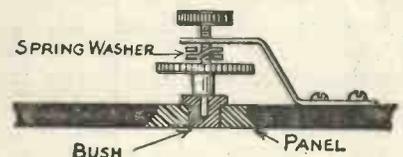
Details of the operating knob and gear wheel for the scheme shown in fig. 5.
